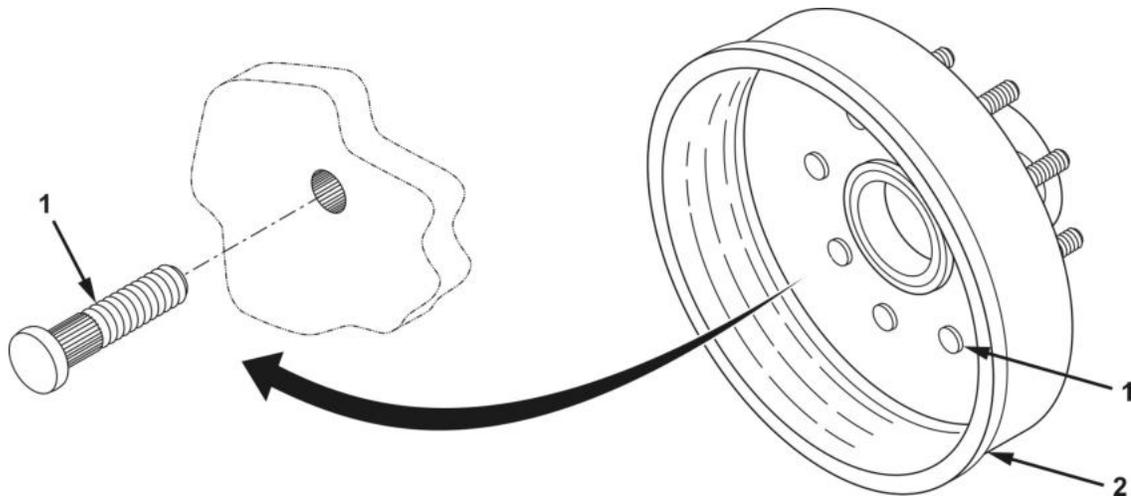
Hub/Drum, Race, and Bearing Seal Cleaning and Inspection.
